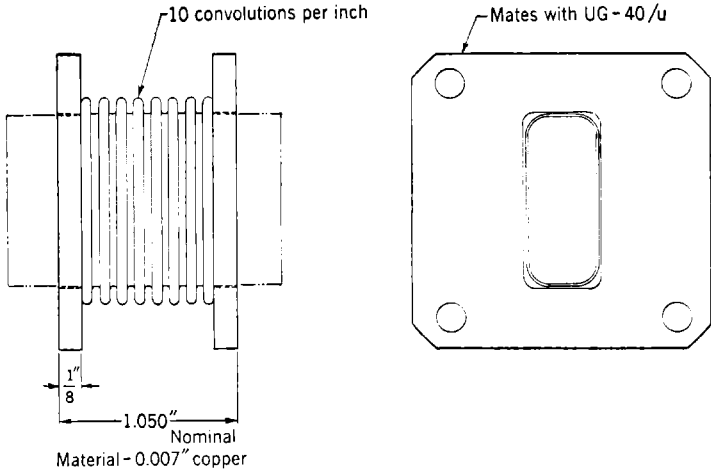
Seamless-corrugated-waveguide assembly for connecting two pieces of RG-52/U waveguide.
